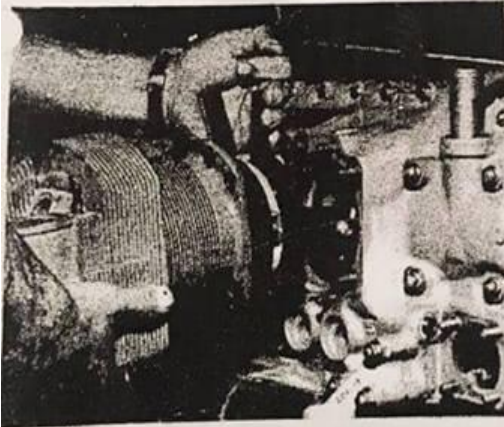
A. INSTALLING NO. 5 CYLINDER.
